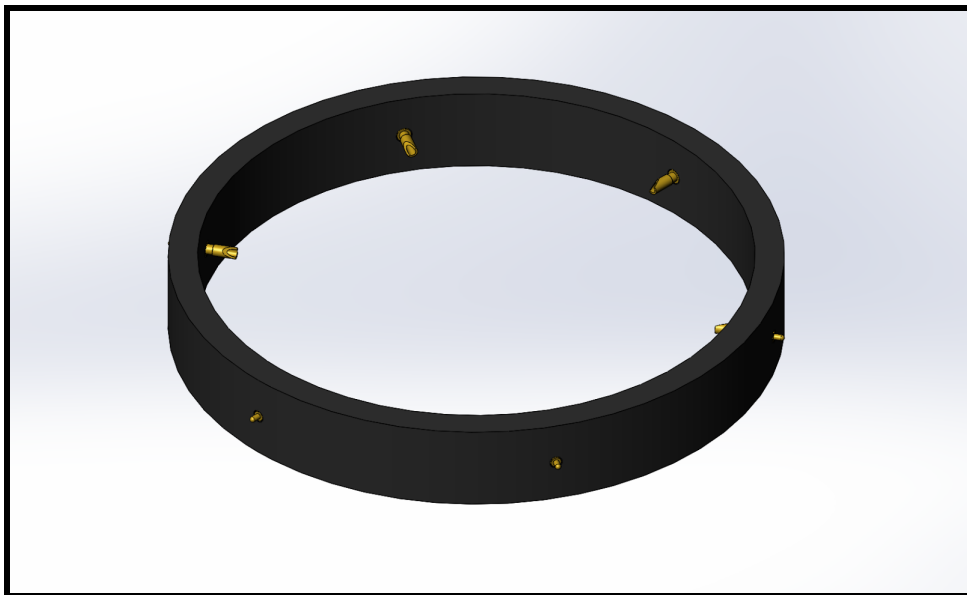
Pogo Contact Assembly with Six Contacts
